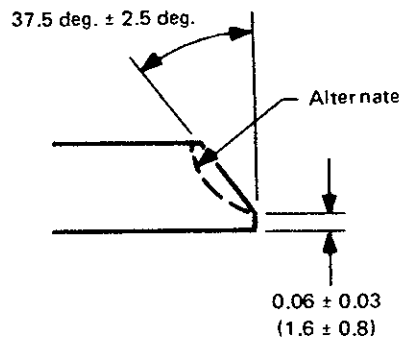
Welding End Detail for Joint Using Continuous Tapered Backing Ring.
